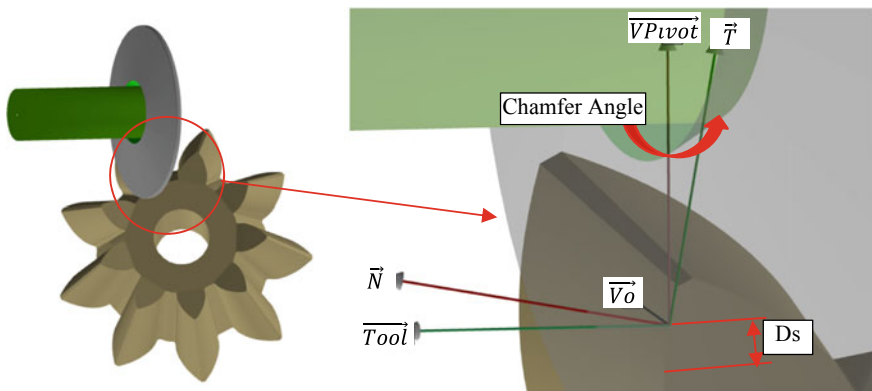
CoSIMT Tool installation for Toe/Heel chamfering—straight bevel gears
